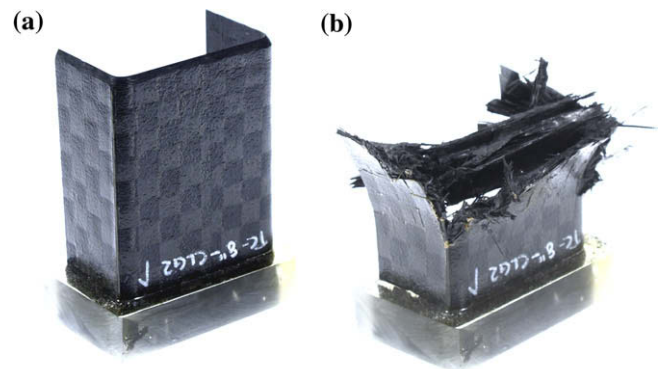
(a, b) Large C-channel, specimen II, before and after crush testing.
